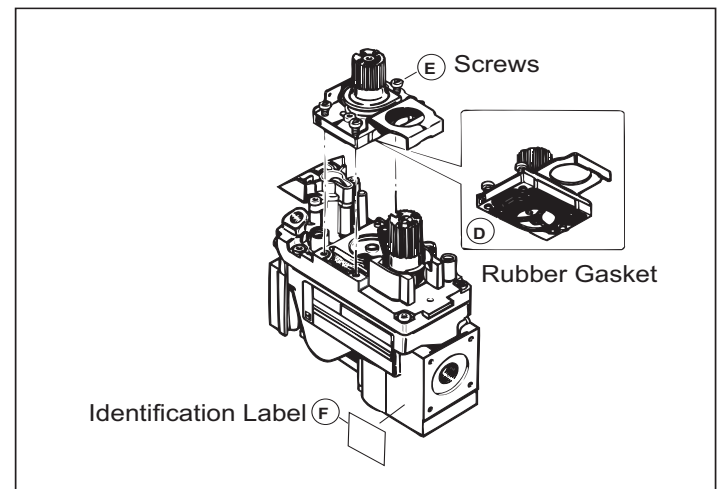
Ensure that the rubber gasket (4) is properly positioned and install the new HI/LO pressure regulator assembly to the valve using the new screws (5) supplied with the kit. Tighten screws securely. (Reference torque = 25 in./lb.) Install the enclosed identification label (6) to the valve body where it can be seen.
